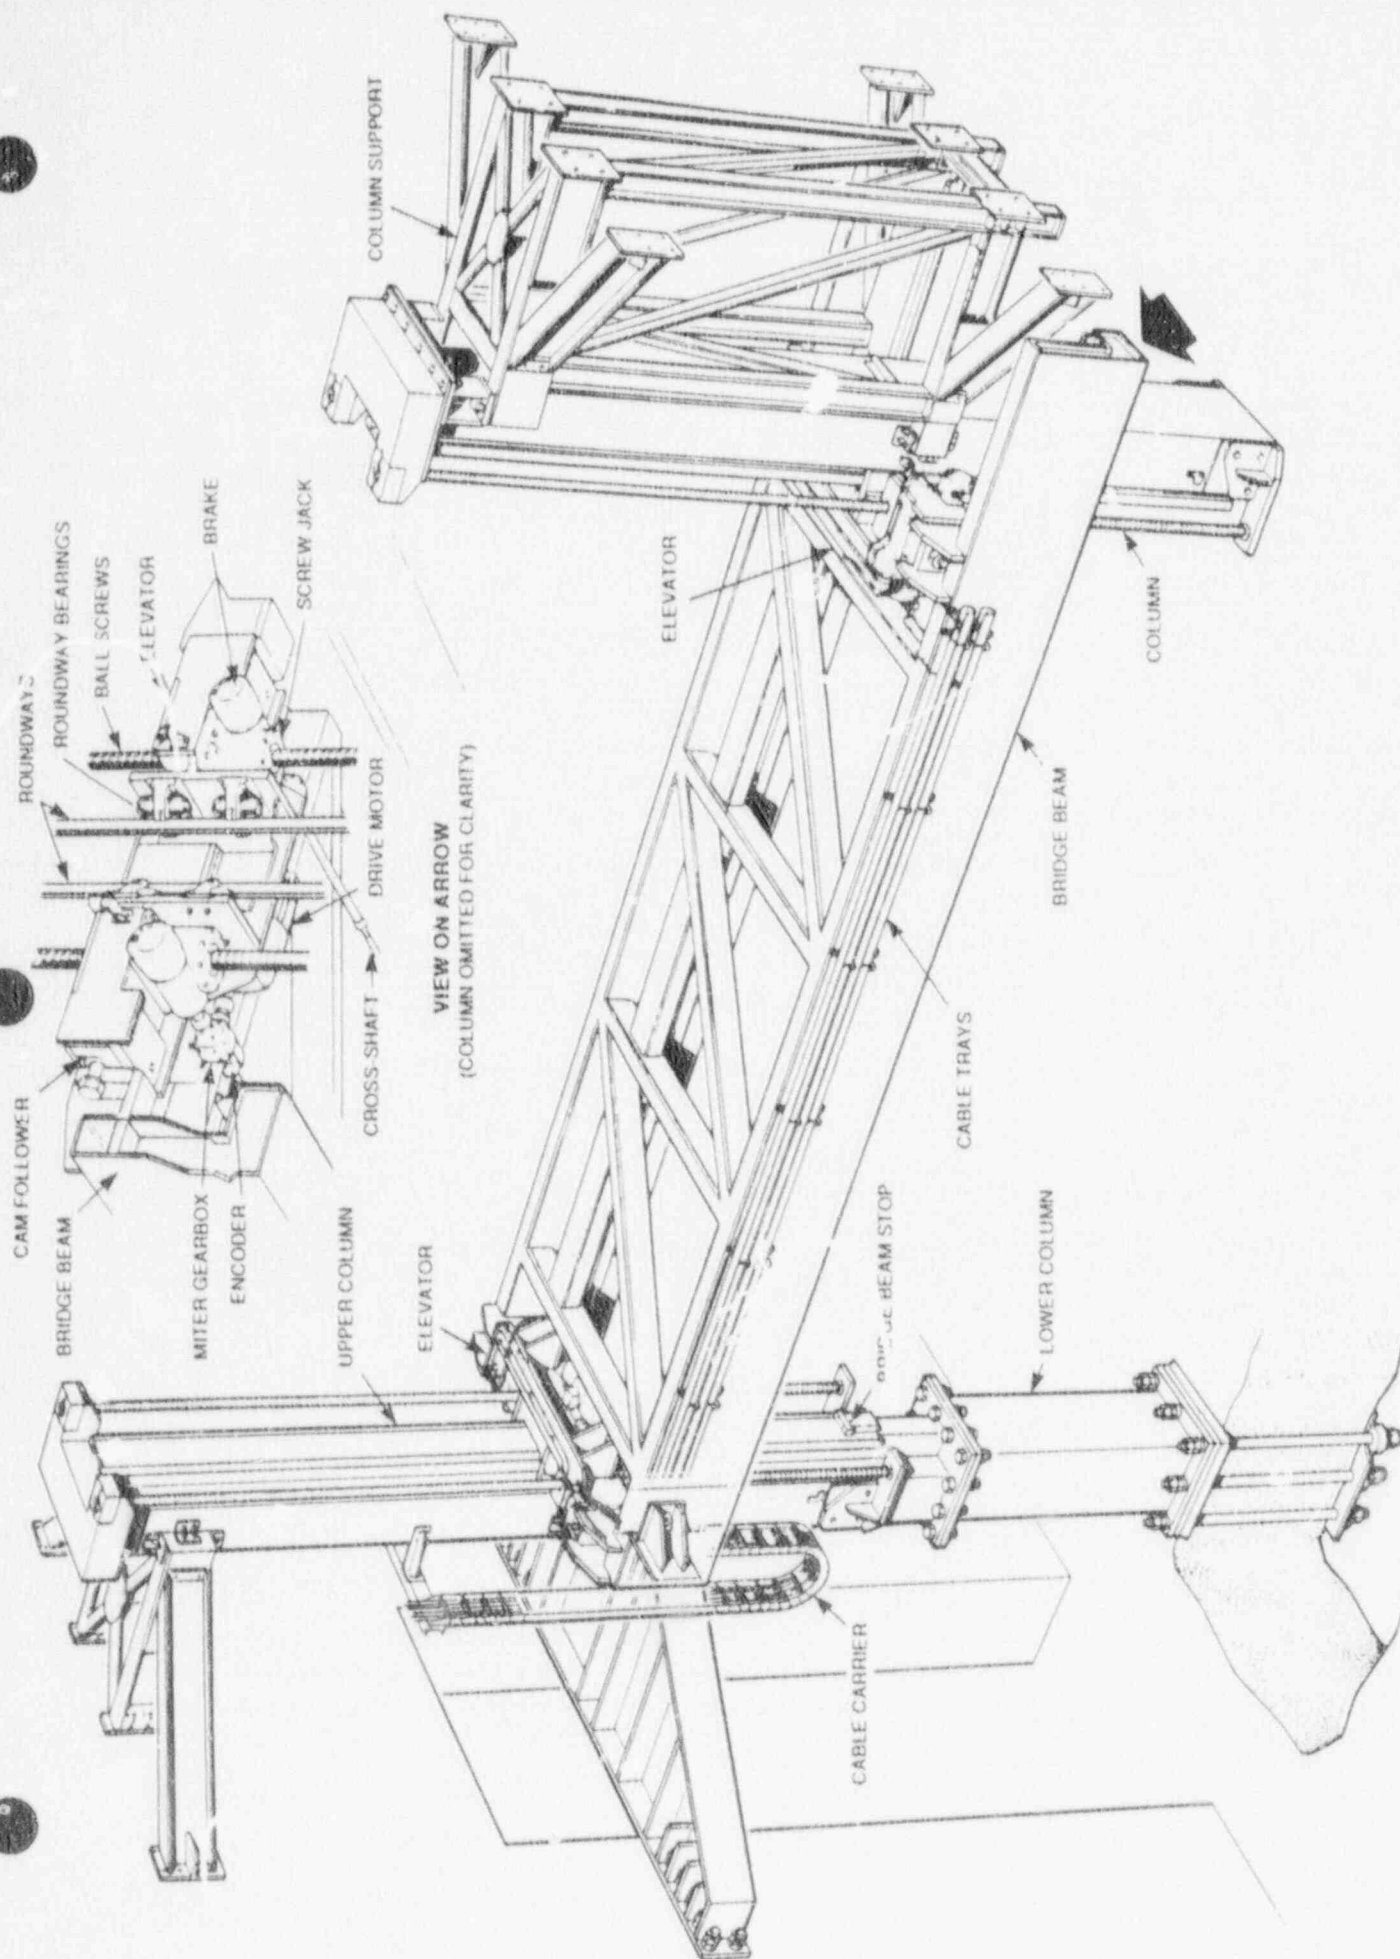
FUELING MACHINE BRIDGE ASSEMBLY
